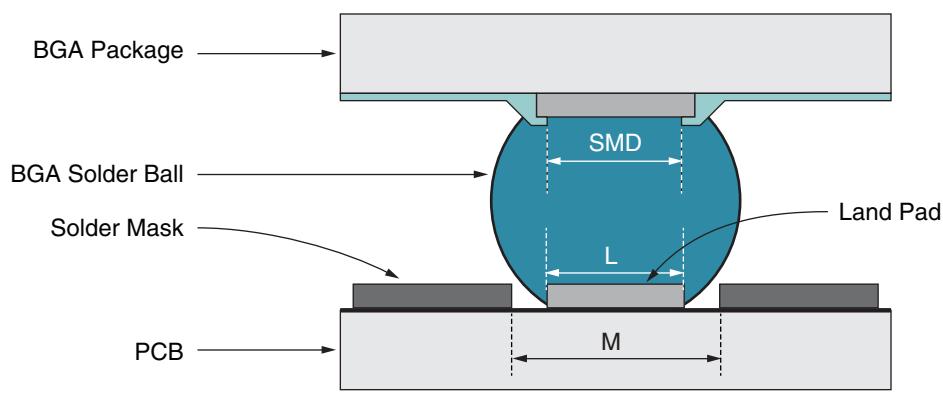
Example of an NSMD PCB Pad Solder Joint
